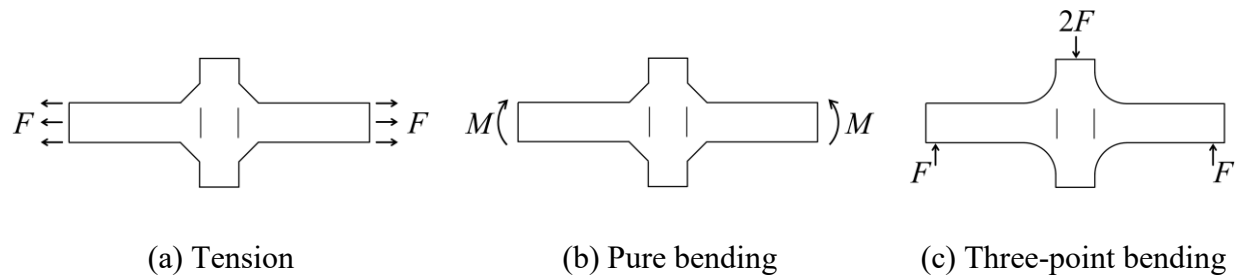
Load-carrying cruciform fillet welded joints: (a) and (b) flat face fillet weld, and (c) concave fillet weld
